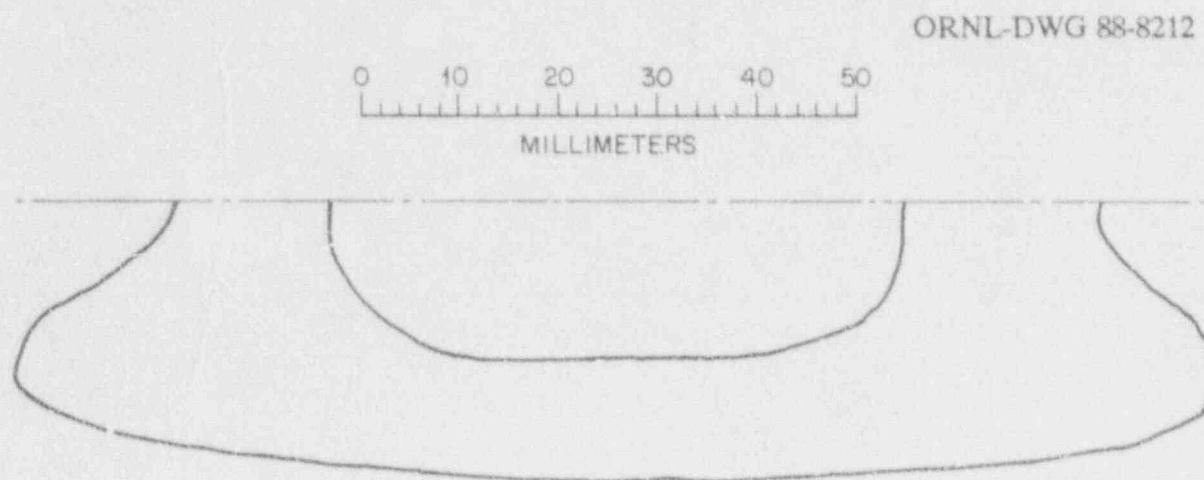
General view of the fracture surface in unclad plate CP-22.
